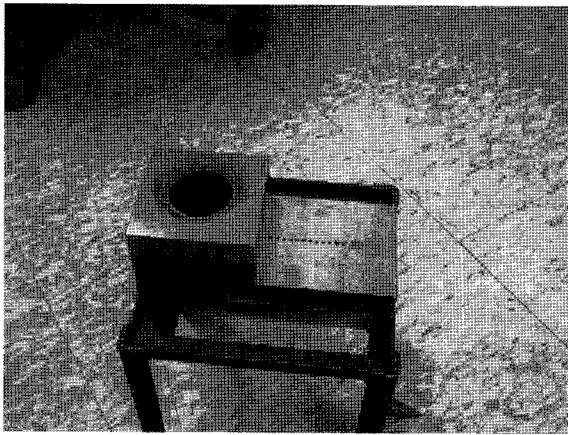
Photograph of mold for the fluidity test with thermocouple holes.
